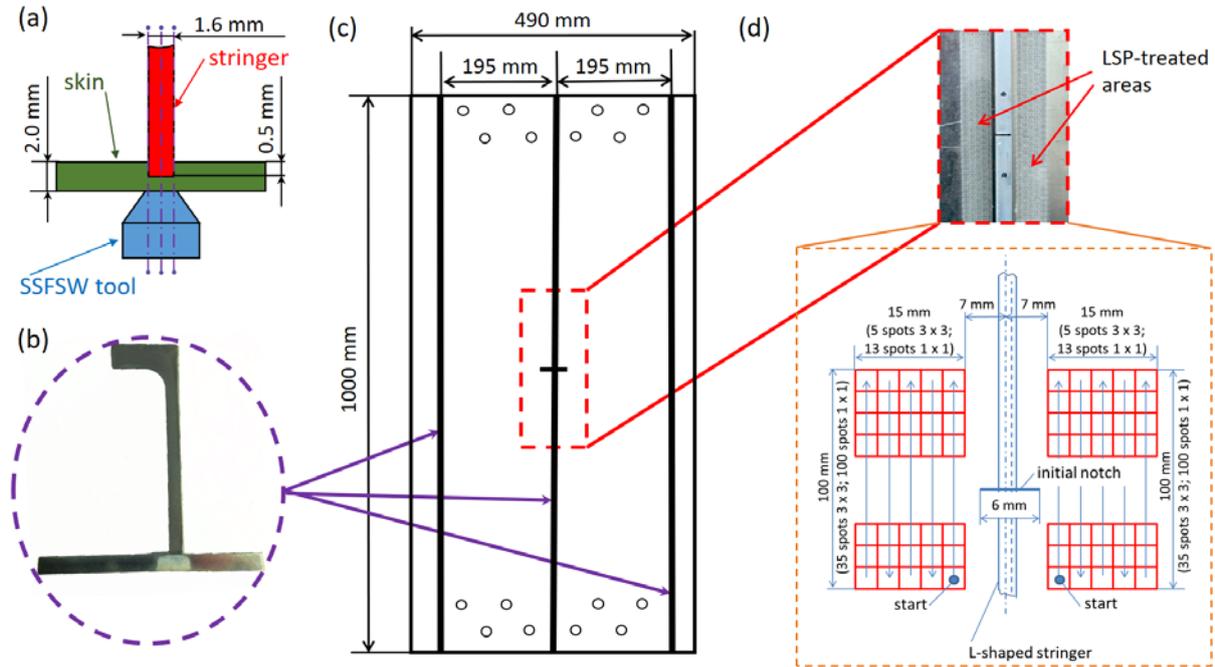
(a) Sketch of the design solution of the tool for the welding of T-joint in two parts with partial penetration and (b) photo of the AA2024-AA7050 T-joint. (c) Geometry of the welded 3-stringer panel and (d) photo and sketch with details regarding the two LSP-treated areas. Depicted and adopted from [20].
